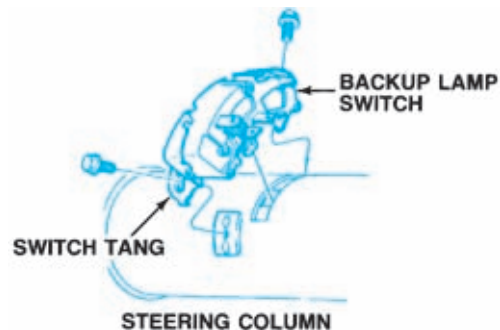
The backup lamp switch can be mounted near the gearshift lever. (GM Service and Parts Operations)
